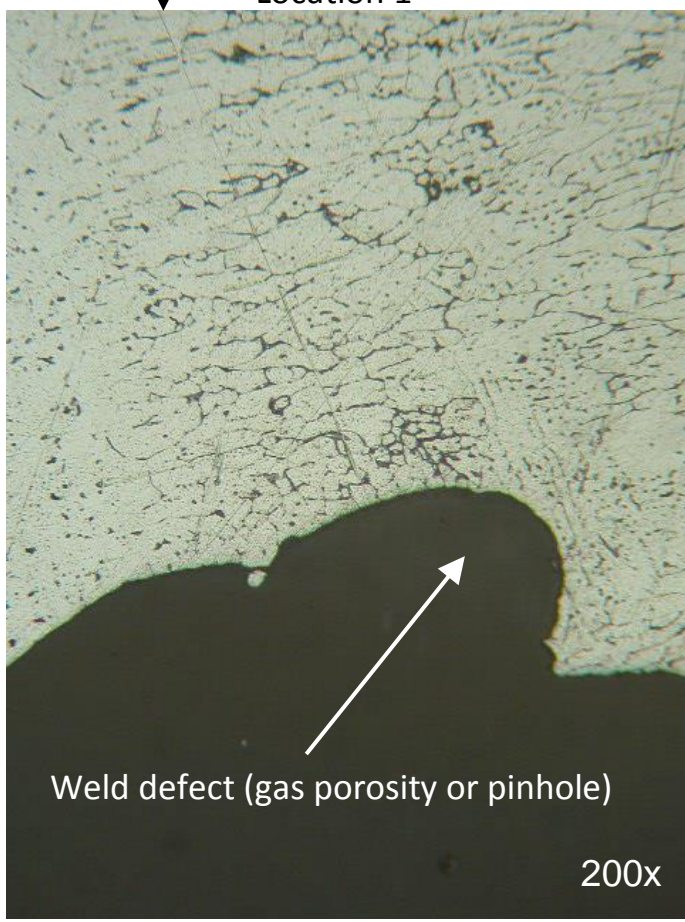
Cross section of a polished and etched specimen obtained from the leaked weld joint between the header and the side bars/parting sheets (sample 1)
